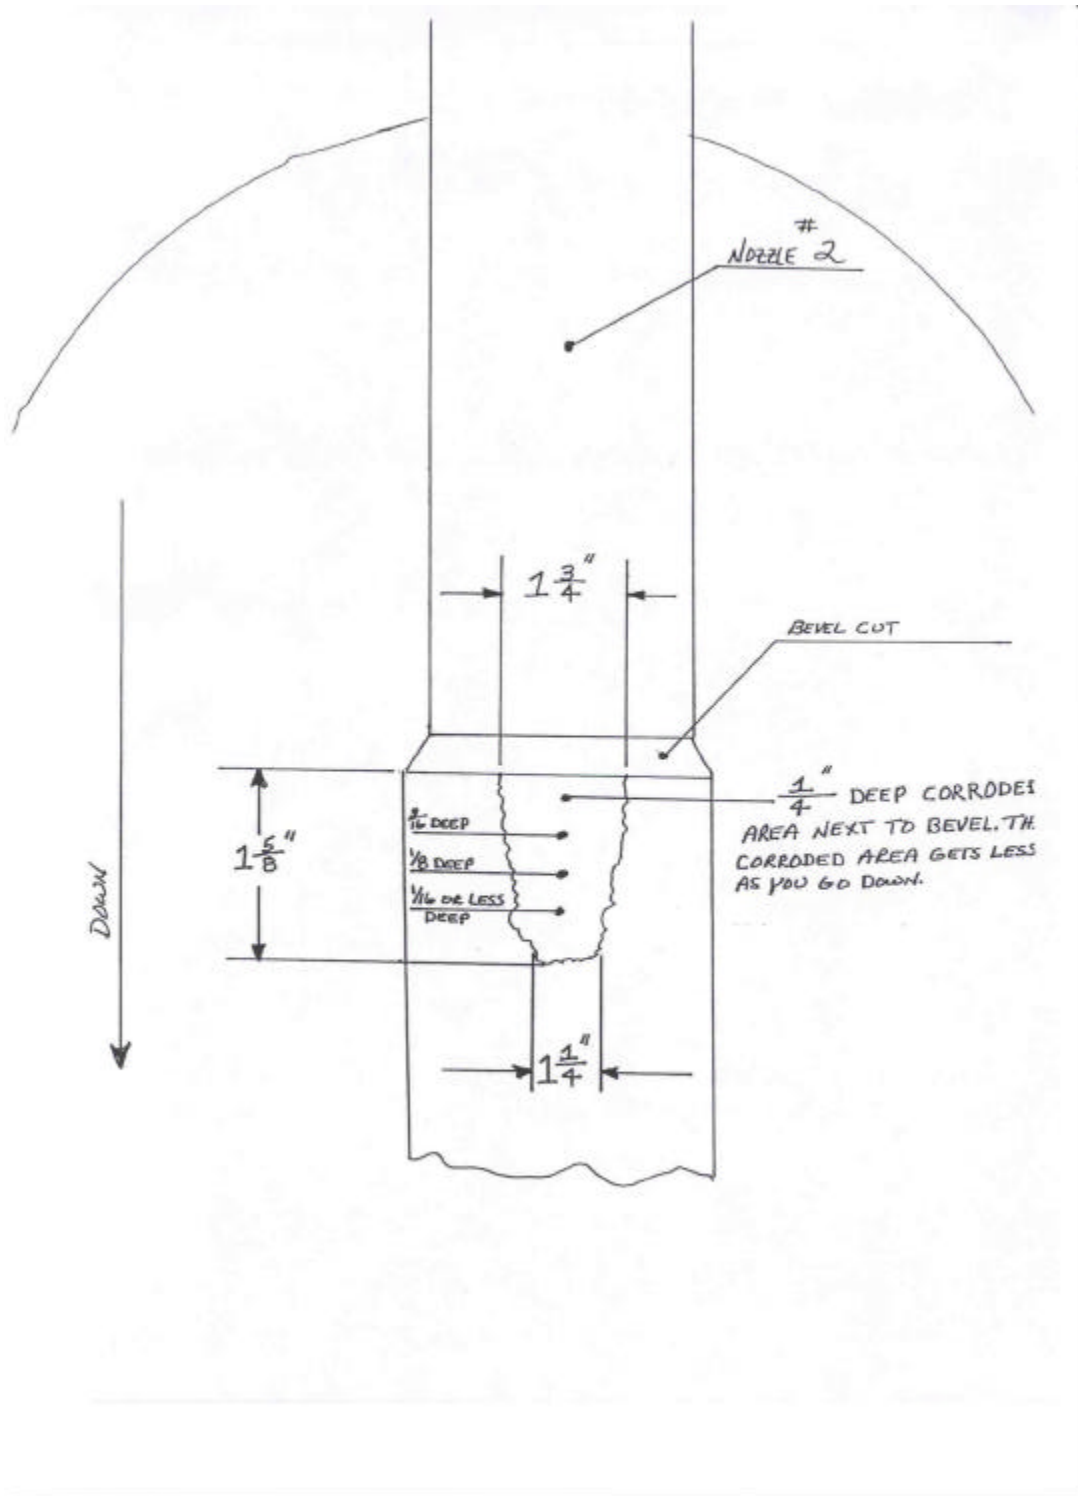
Corrosion at Nozzle 2 Drawing Side View
